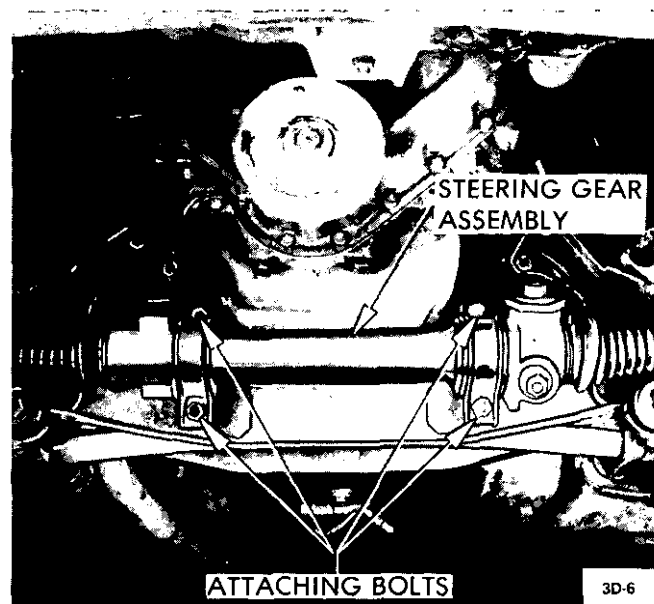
D-6 Steering Gear Assembly Attaching Bolts
